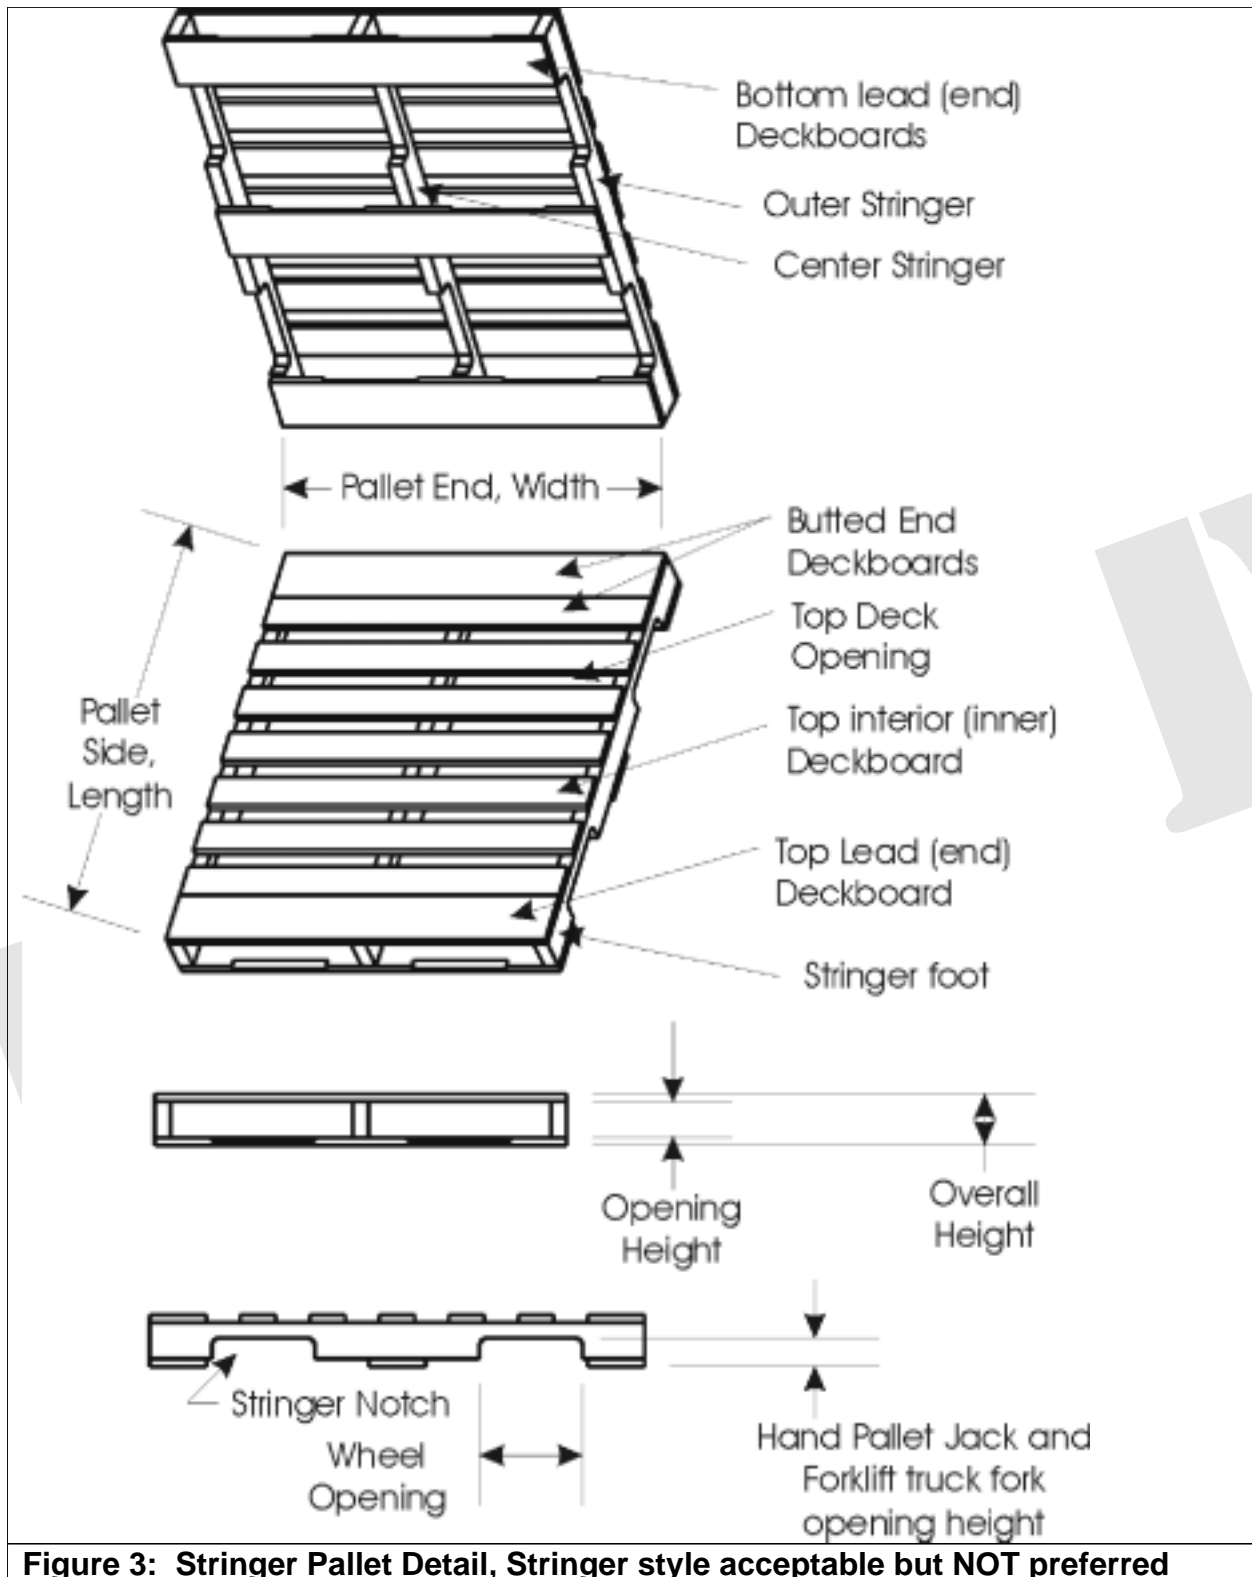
Stringer Pallet Detail, Stringer style acceptable but NOT preferred
